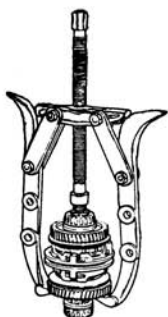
Using a suitable pulley, remove output shaft from forward and reverse gear assemblies as illustrated. Care should be taken to protect threaded end of output shaft.
